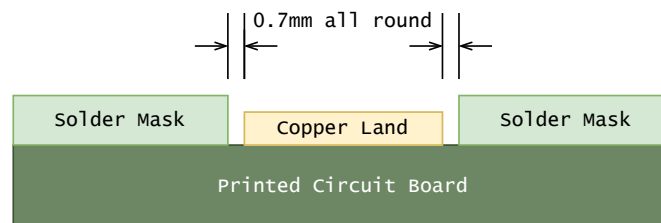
Preferred solder mask opening, side view, dimensions in [mm].
